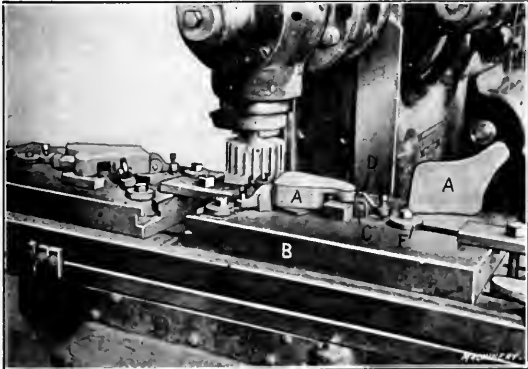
Adjustable Work-holding Fixture on a Milling Machine
